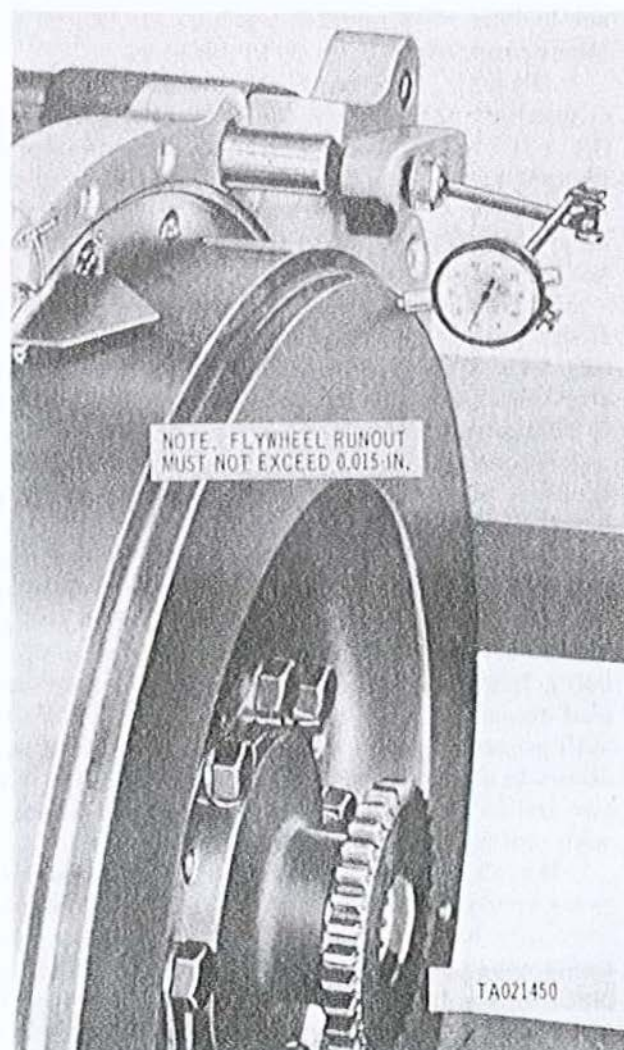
Checking flywheel runout using dial indicator, model AVDS-1790-2C and AVDS-1790-2D engines.
